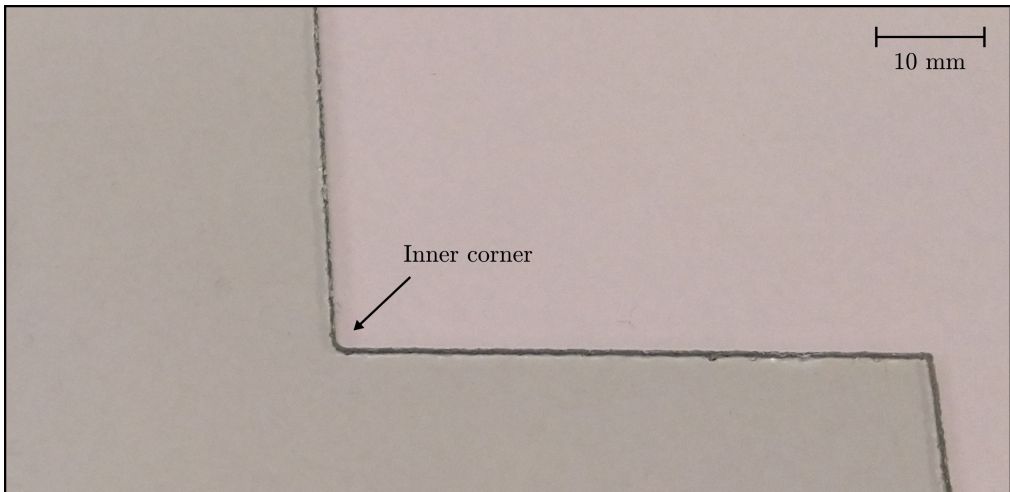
Edge finish of the waterjet-cut L-shaped specimen.
